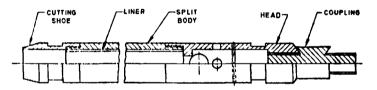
ASSEMBLY OF SPLIT SPOON SAMPLER
